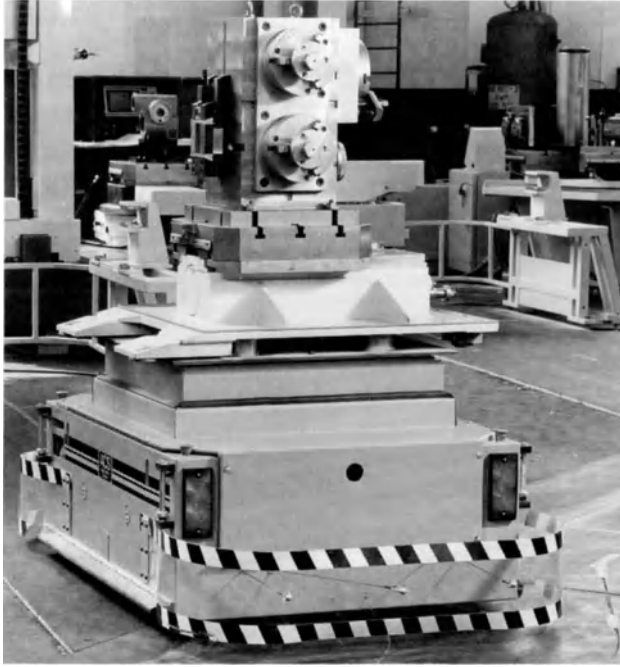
An automated guided vehicle in the process of delivering a range of palletised workpieces held on a “cube” to a horizontal machining centre. [Courtesy of Cincinnati Milacron.]
